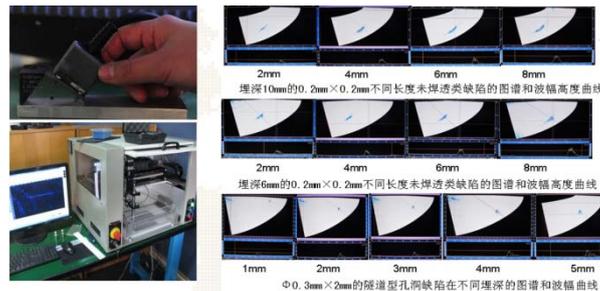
Ultrasonic phased array inspection for friction welding joints.
